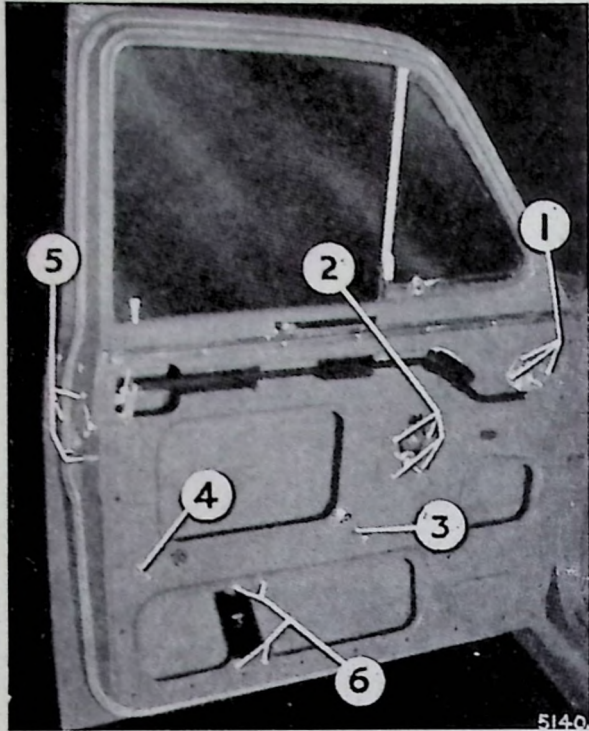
General view of the front door with trim pad removed. (Saloon and Estate car.)
